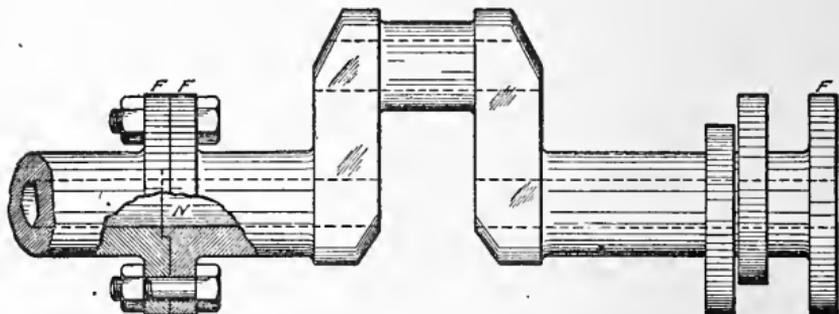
Portion of Marine Engine Crank Showing Method of Bolting Sections Together
